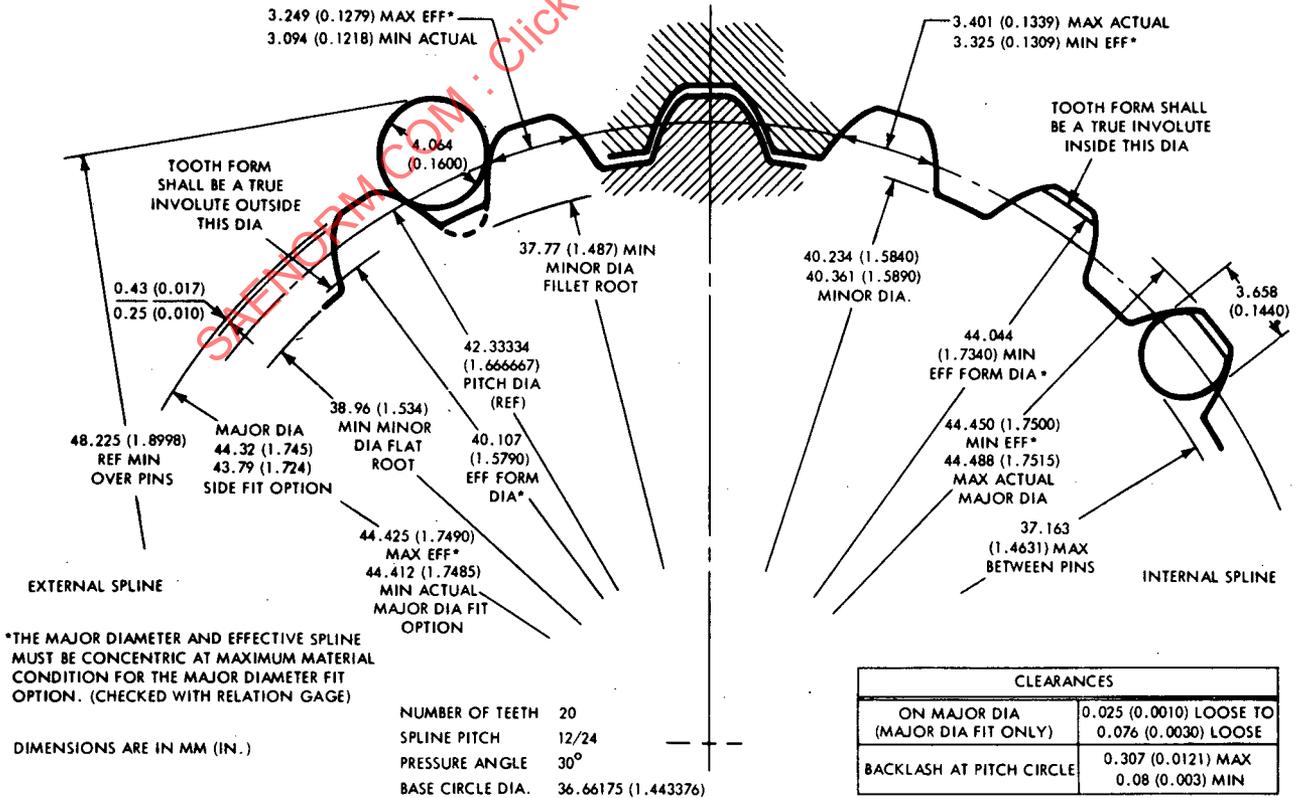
1000 R/MIN POWER TAKE-OFF (45 mm (1 3/4 in) involute spline dimensions)
